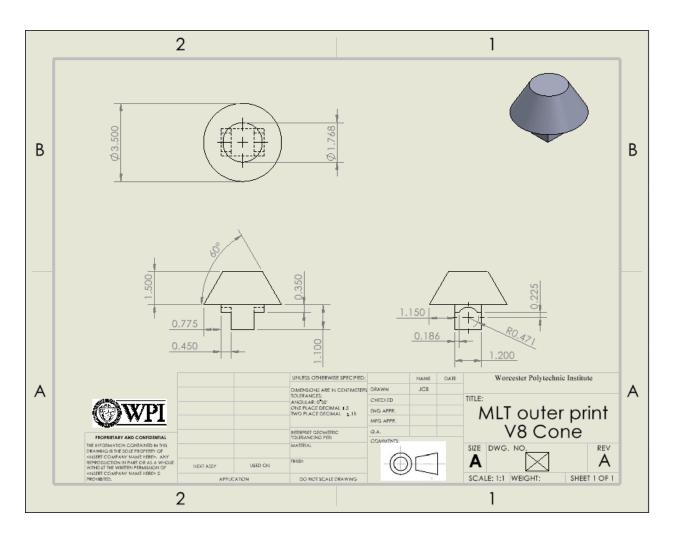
CAD Drawing schematic for the final design of the conic section of the top half of the cap.
